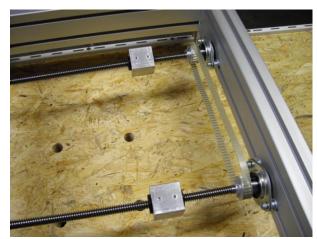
Belt and POM nut holder M4 mounted on threaded spindles
